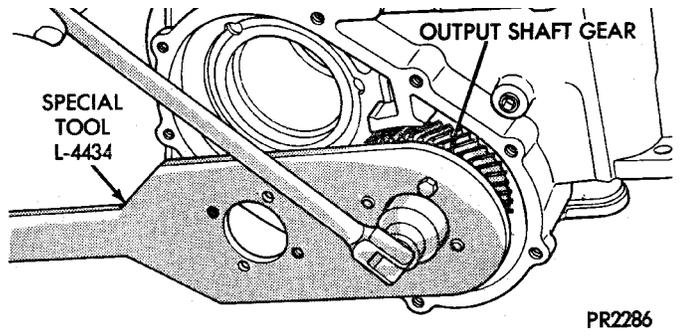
Stirrup and Strap Removed From Output Gear
